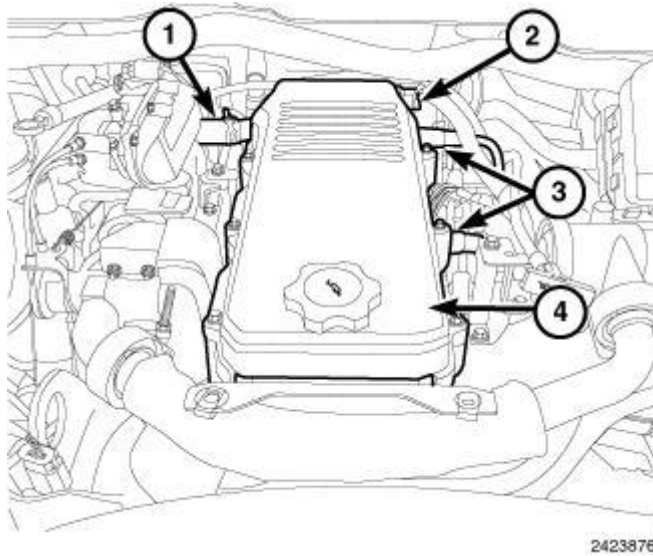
Identifying CCV Tube, Crankcase Pressure Sensor Connector, CCV Oil Drains & Close Crankcase Ventilation (CCV) Cover
